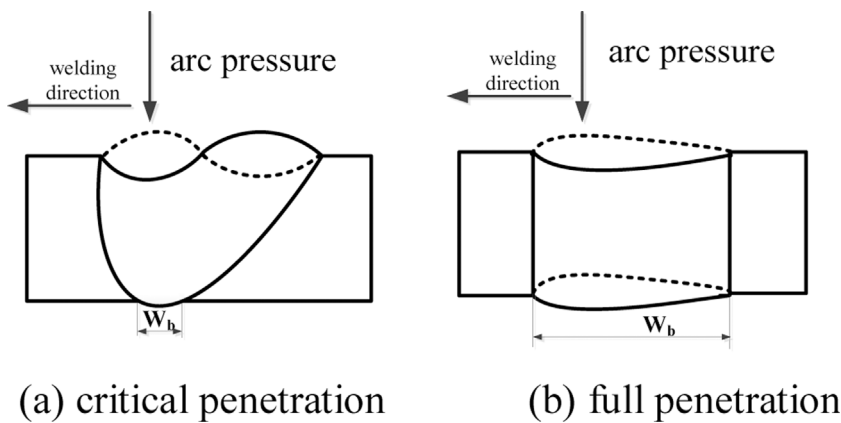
High welding speed welding process. (a) Critical penetration. (b) Full penetration.
